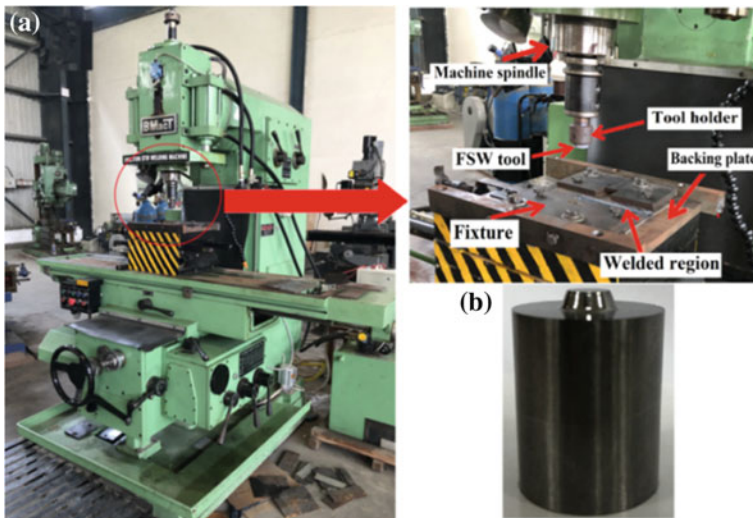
a Friction stir welding experimental setup, b FSW tool
